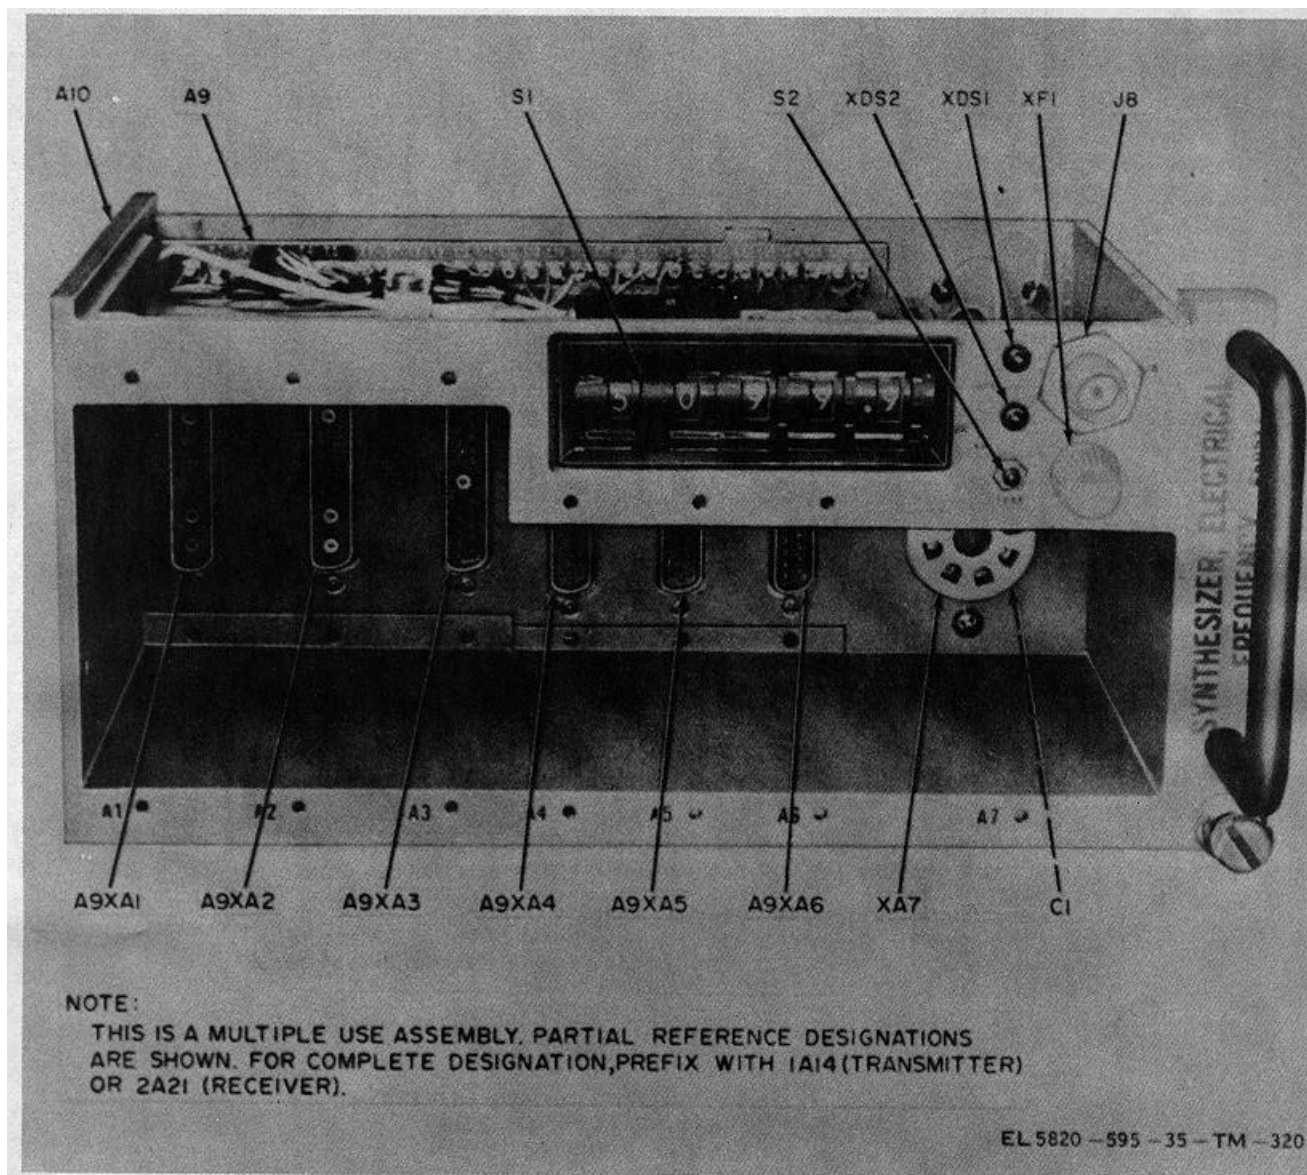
Frequency synthesizer 1A14/2A21, partially disassembled, front view, parts location.
